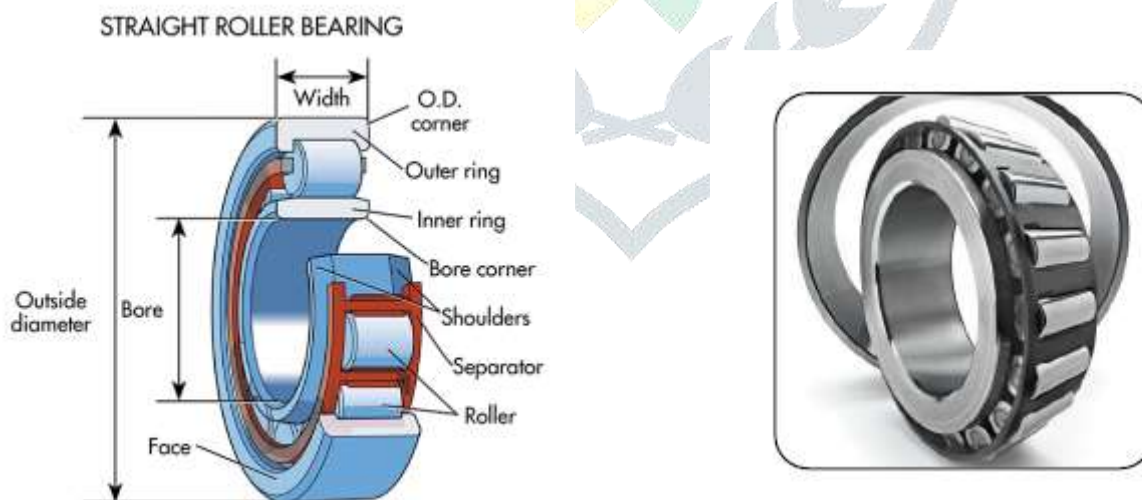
Cylindrical roller Bearing and Taper roller Bearing[1]
